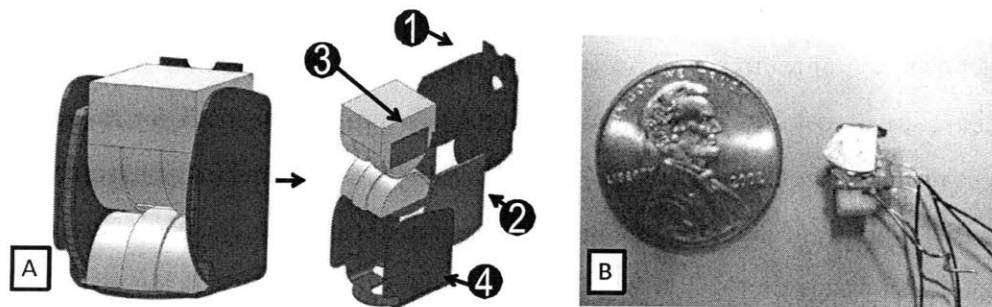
Sample solder-activated joint. (A) The joint, in light grey, uses flexures to keep the top and bottom half-cylinders in contact. Rolling of the top half-cylinder over the bottom is constrained when the solder (2) between the two copper pieces (1 & 4) is solidified. Current is run through a strain gage (3) within the joint to melt the solder. (B) Picture of an actual solder activated joint designed and built using this thesis.
